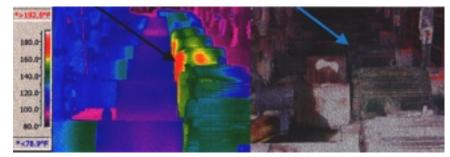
Warm inboard motor bearing. Image taken in a manner to readily compare IR images of several running motors.
